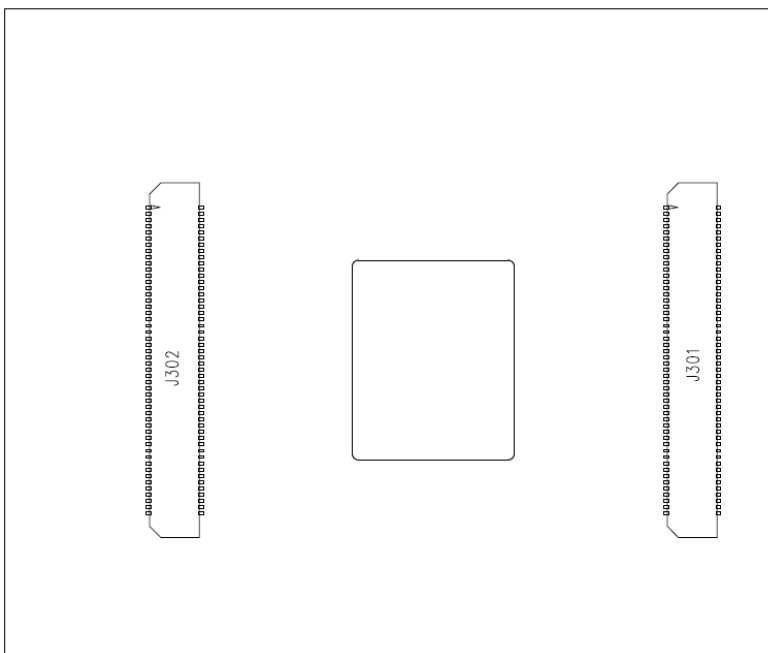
AirPrime SL6087 Socket-Up Board (Bottom View)
